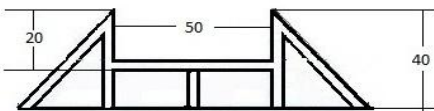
The top view of the wireframe model on single wheel side of chassis (all units are in cm)
